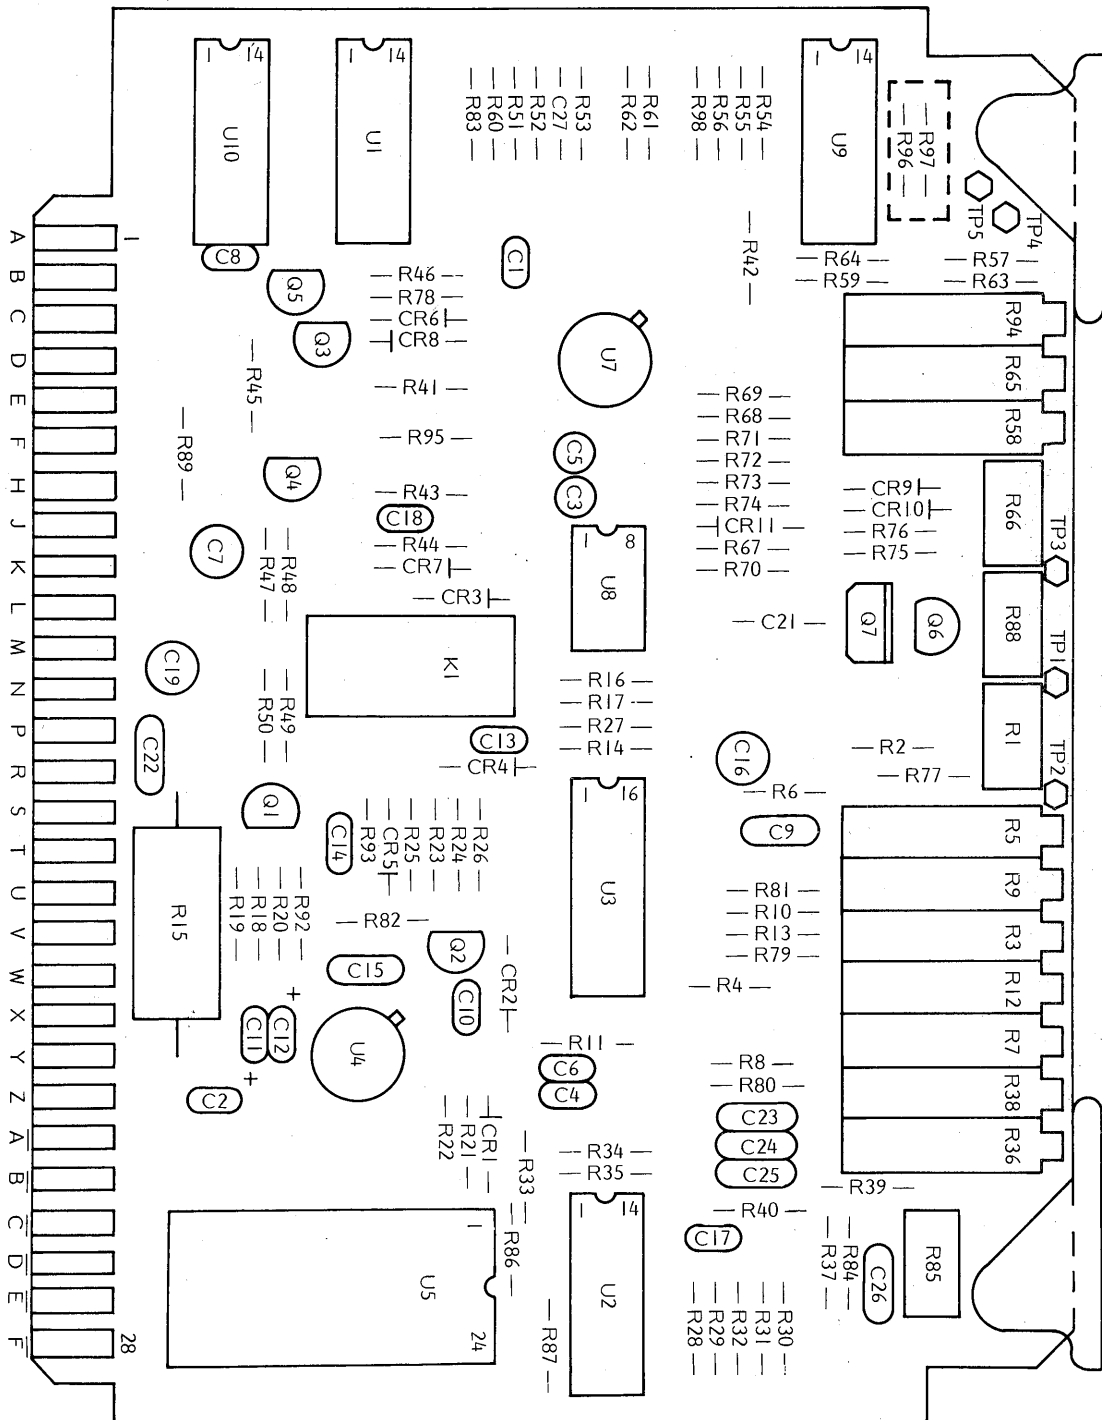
A6 Het/YIG Driver PCB, Assy. 660-D-8006-3, -4, -6, -7, -8 Schematic (Sheet 3 of 3)
